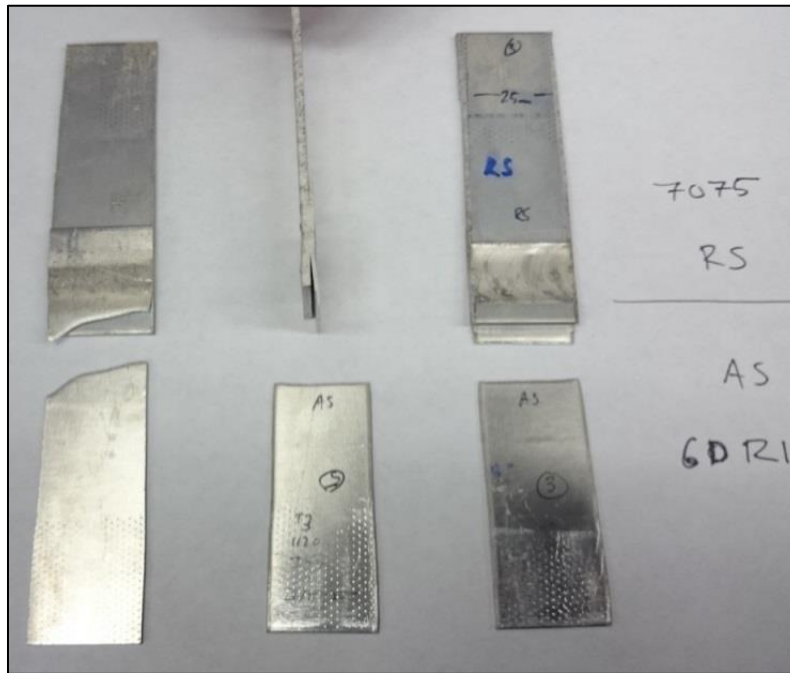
Location of fracture during the lap shear pull tests of dissimilar lap FSW of AA7075-T6 to AA6022-T4. Welding conditions are, from left to right: Tool3-250mm/min, Tool3-355mm/min, Tool3-500mm/min.
